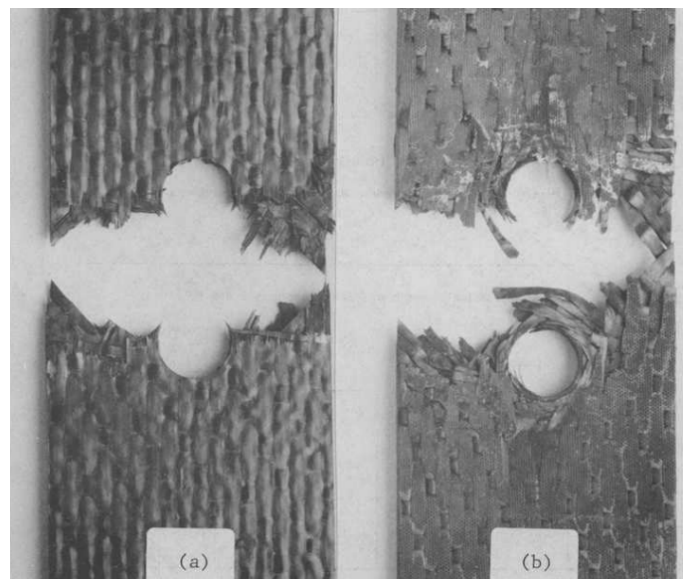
the fracture of specimen (a) composite specimen with drilled hole and (b) a moulded hole, image from [7].
